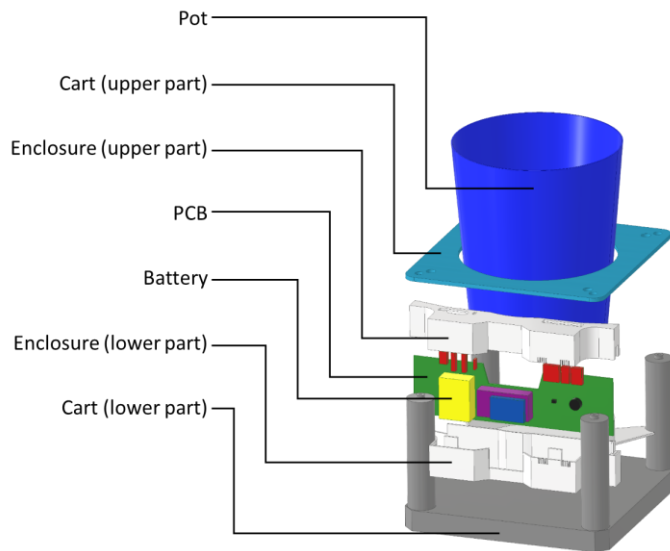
Scheme of the control unit's main components. Four parts of the control units are visible: the case (upper and lower), the printed circuit board (PCB) and the battery. PCB and battery are enclosed in the case and held inside the cart.
